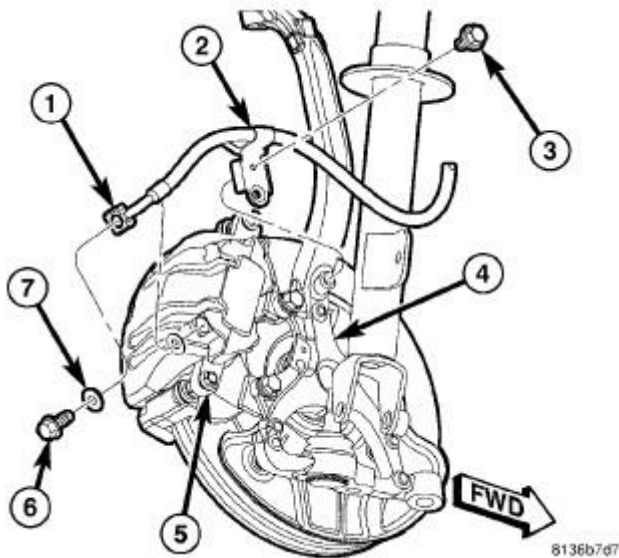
FRONT BRAKE FLEX HOSE AT CALIPER
